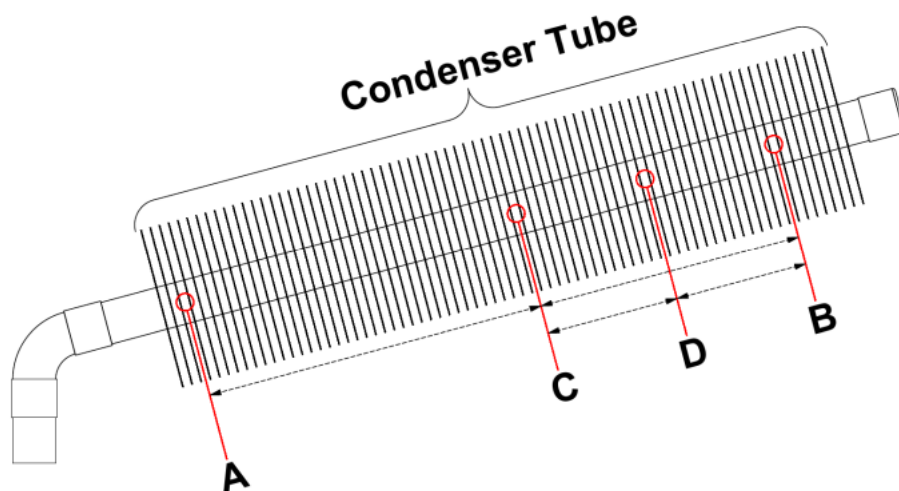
Heat Pipe Condenser Tube Temperature Inspection Points
